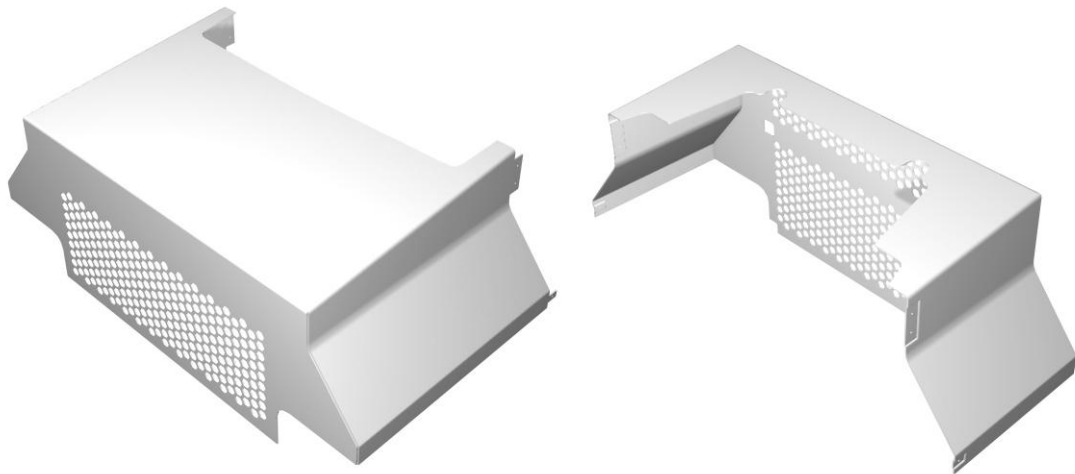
Isometric views of the base casing. To the left is the front and to the right the rear.
